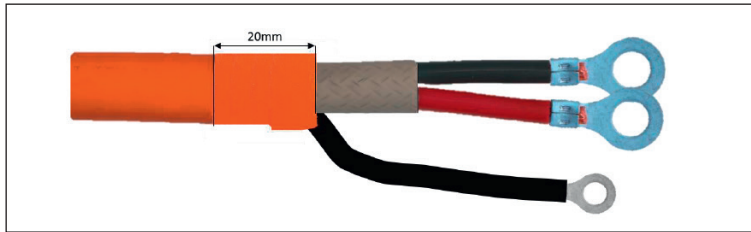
Two-core HV power cable: apply insulating tape to the marked section
